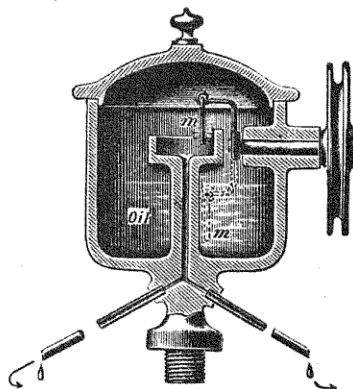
Lubricator of the Gasmotorenfabrik Deutz.
